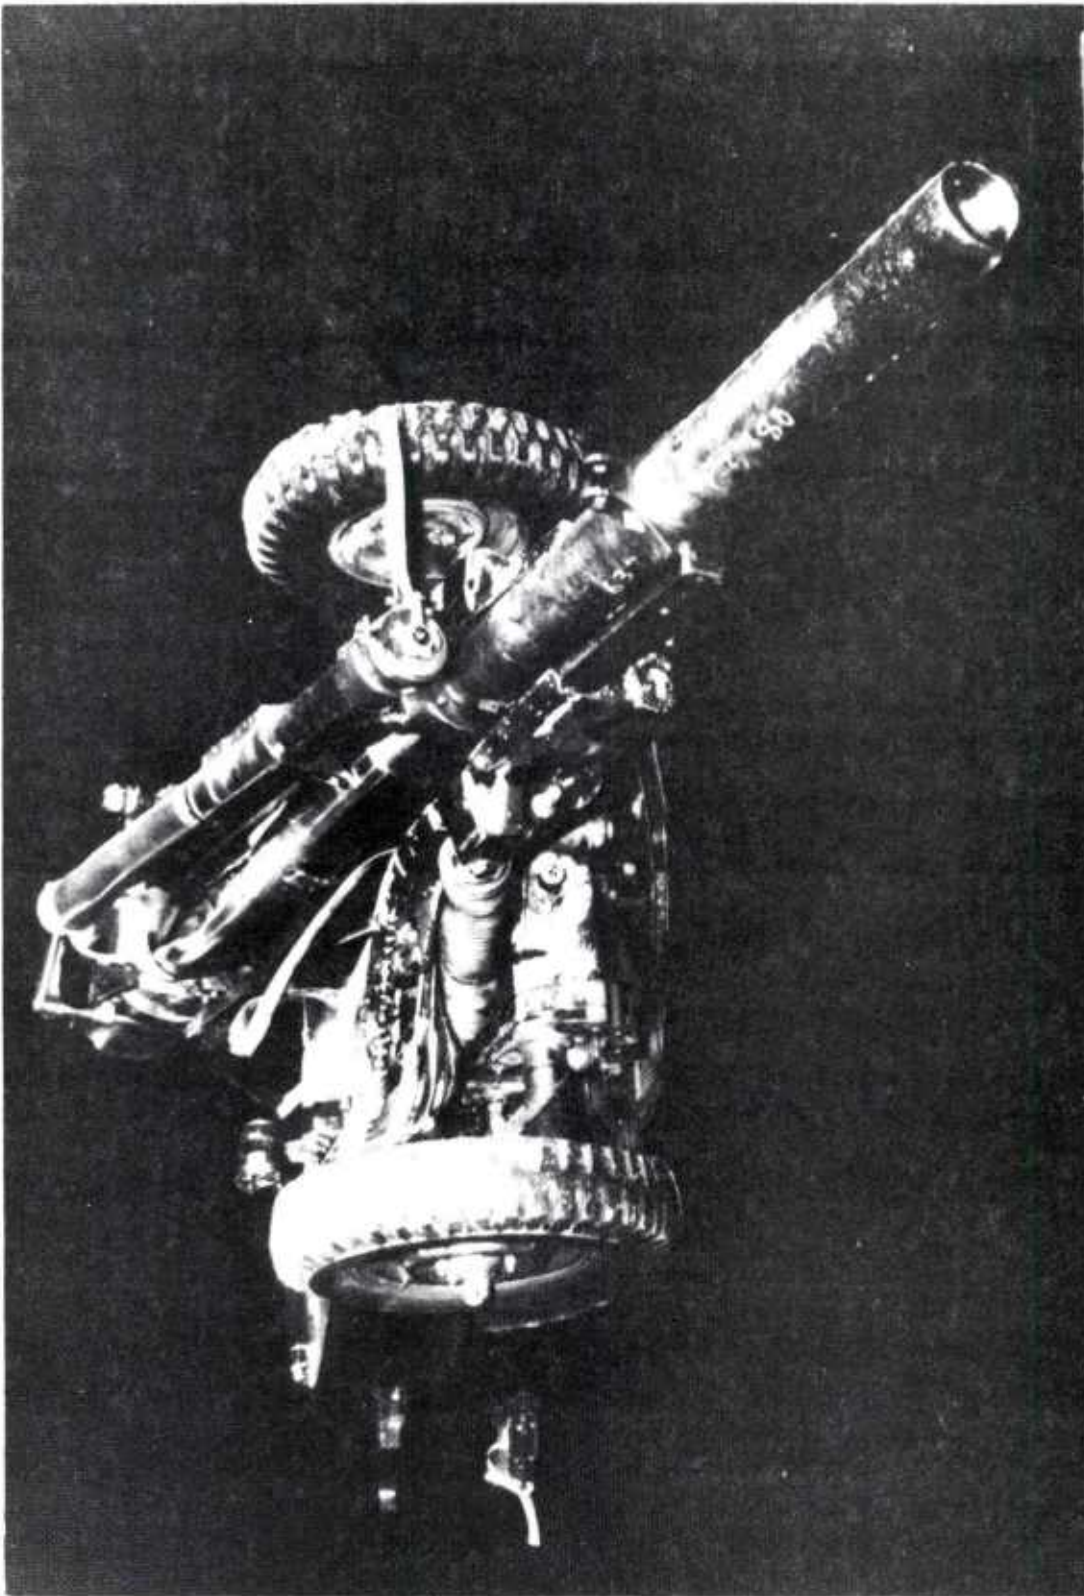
Fatigue failure in howitzer tube. The photo shows the fracture produced by fatigue crack growth during firing to failure of a 100% overstrained autofrettaged 105mm howitzer barrel.
